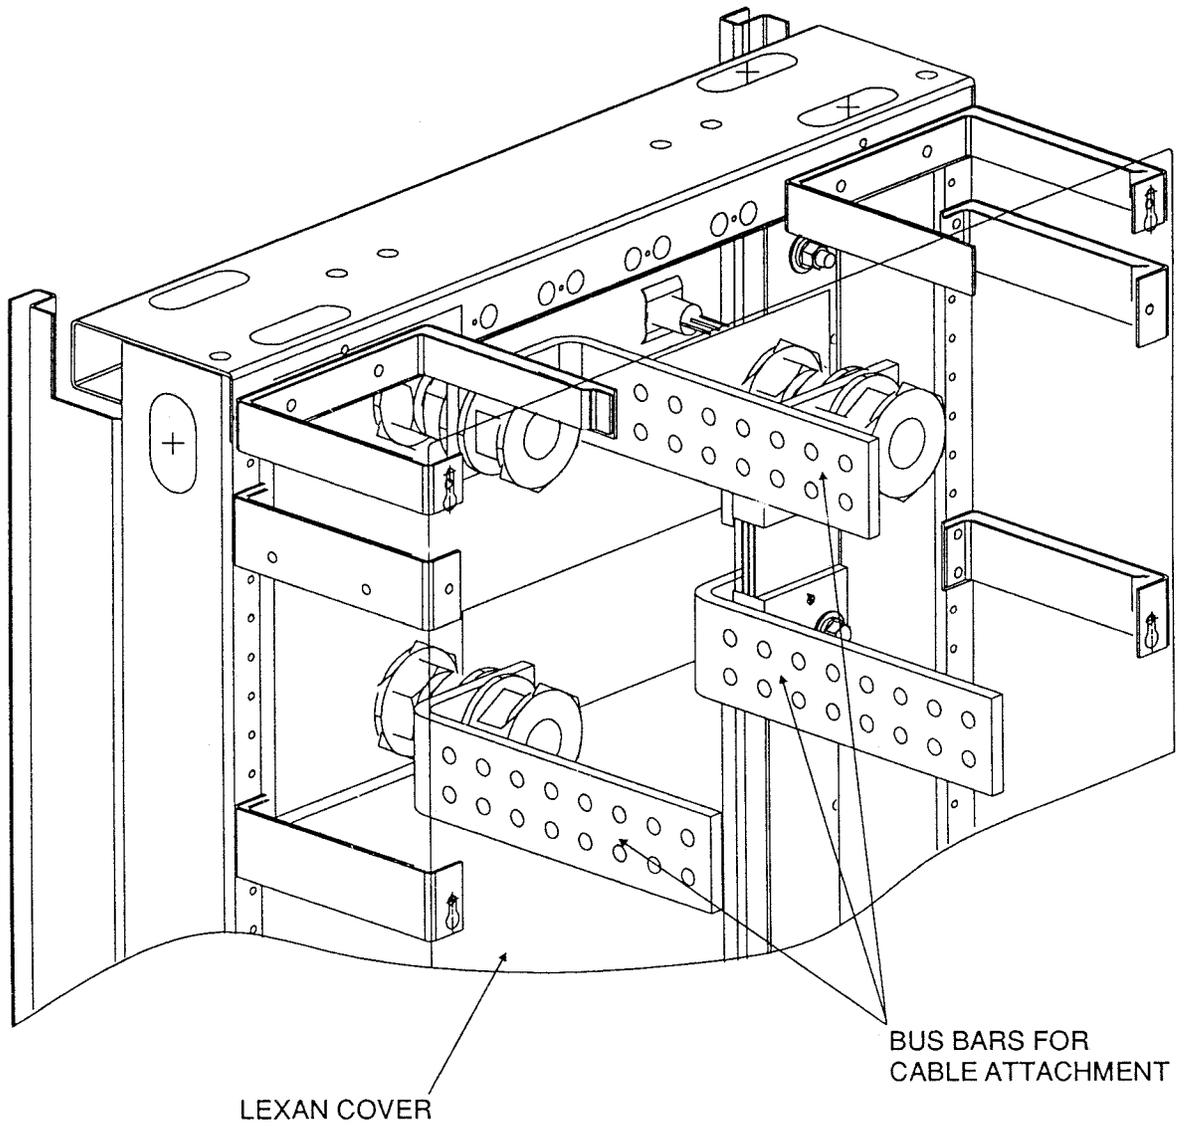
Rear View of ED83134-30 Switch and Fuse Panel
